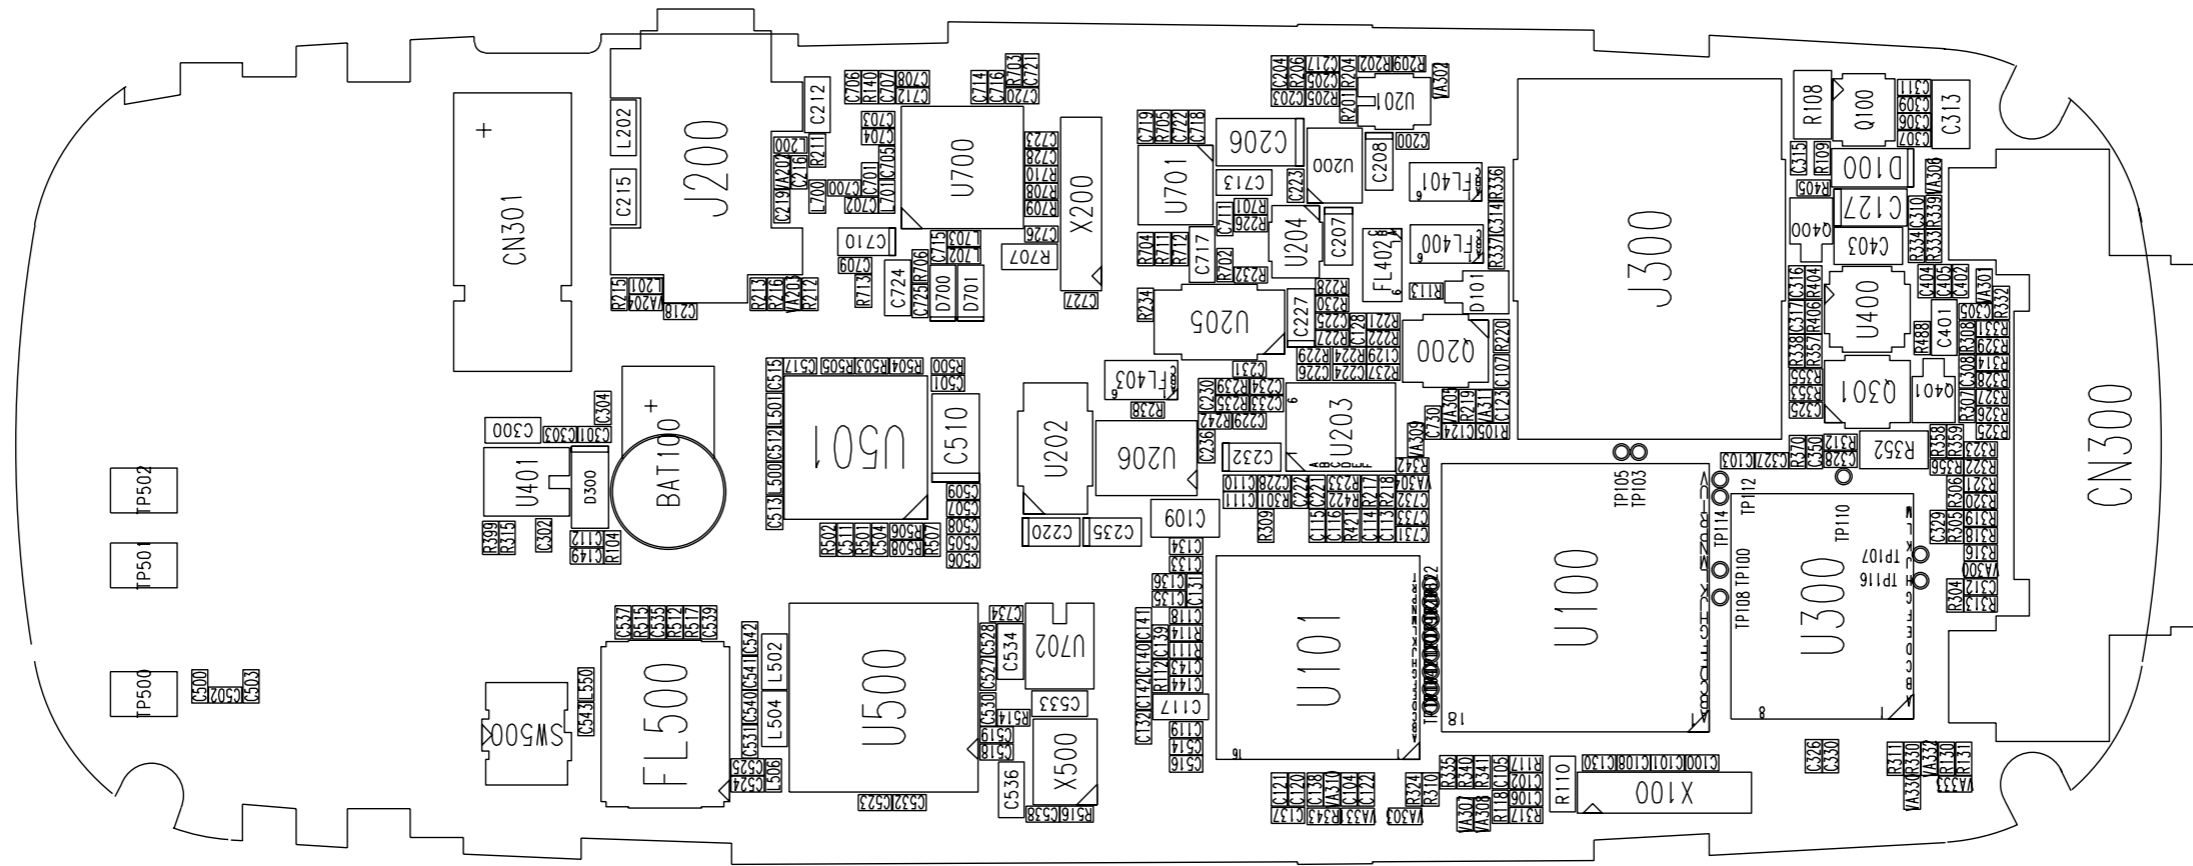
B2000 BOTTOM SIDE PCB LAYOUT
